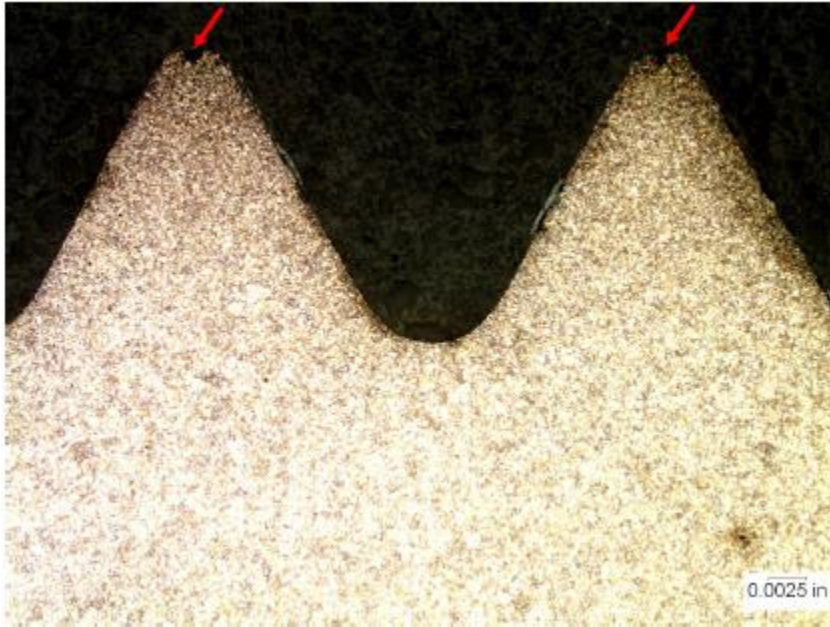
Cross section of the cracked bolt threads etched in nital exhibited seams at the thread crests (red arrows) indicating that threads were rolled.
